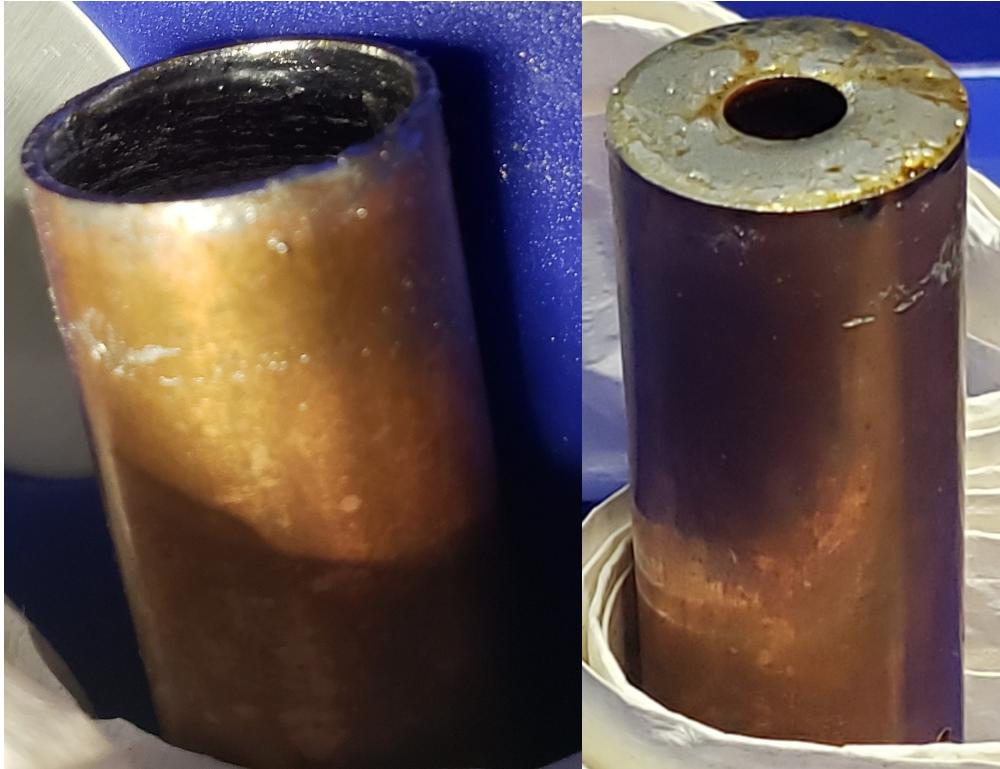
Left: cable end of tube tinned for a press fit washer. Right: washer installed in cable end of tube.
